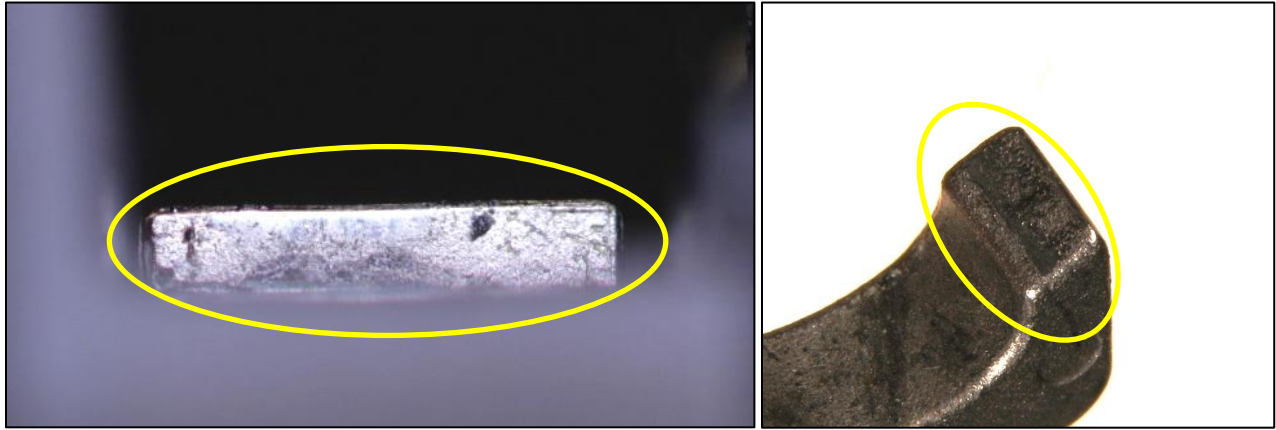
Close ups of sear step (left), and striker foot (right), both unmachined surfaces
